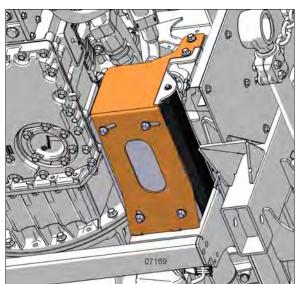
COOLER POSITION DURING ENGINE CRADLE INSERTION OR REMOVAL
